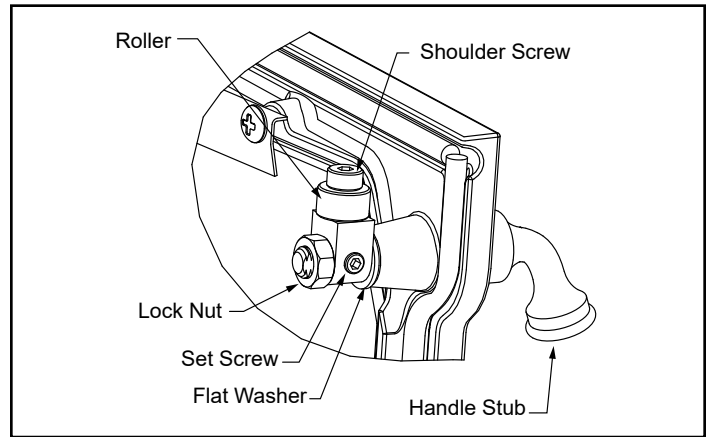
Rotate pawl and/or remove flat washer to adjust latch.
